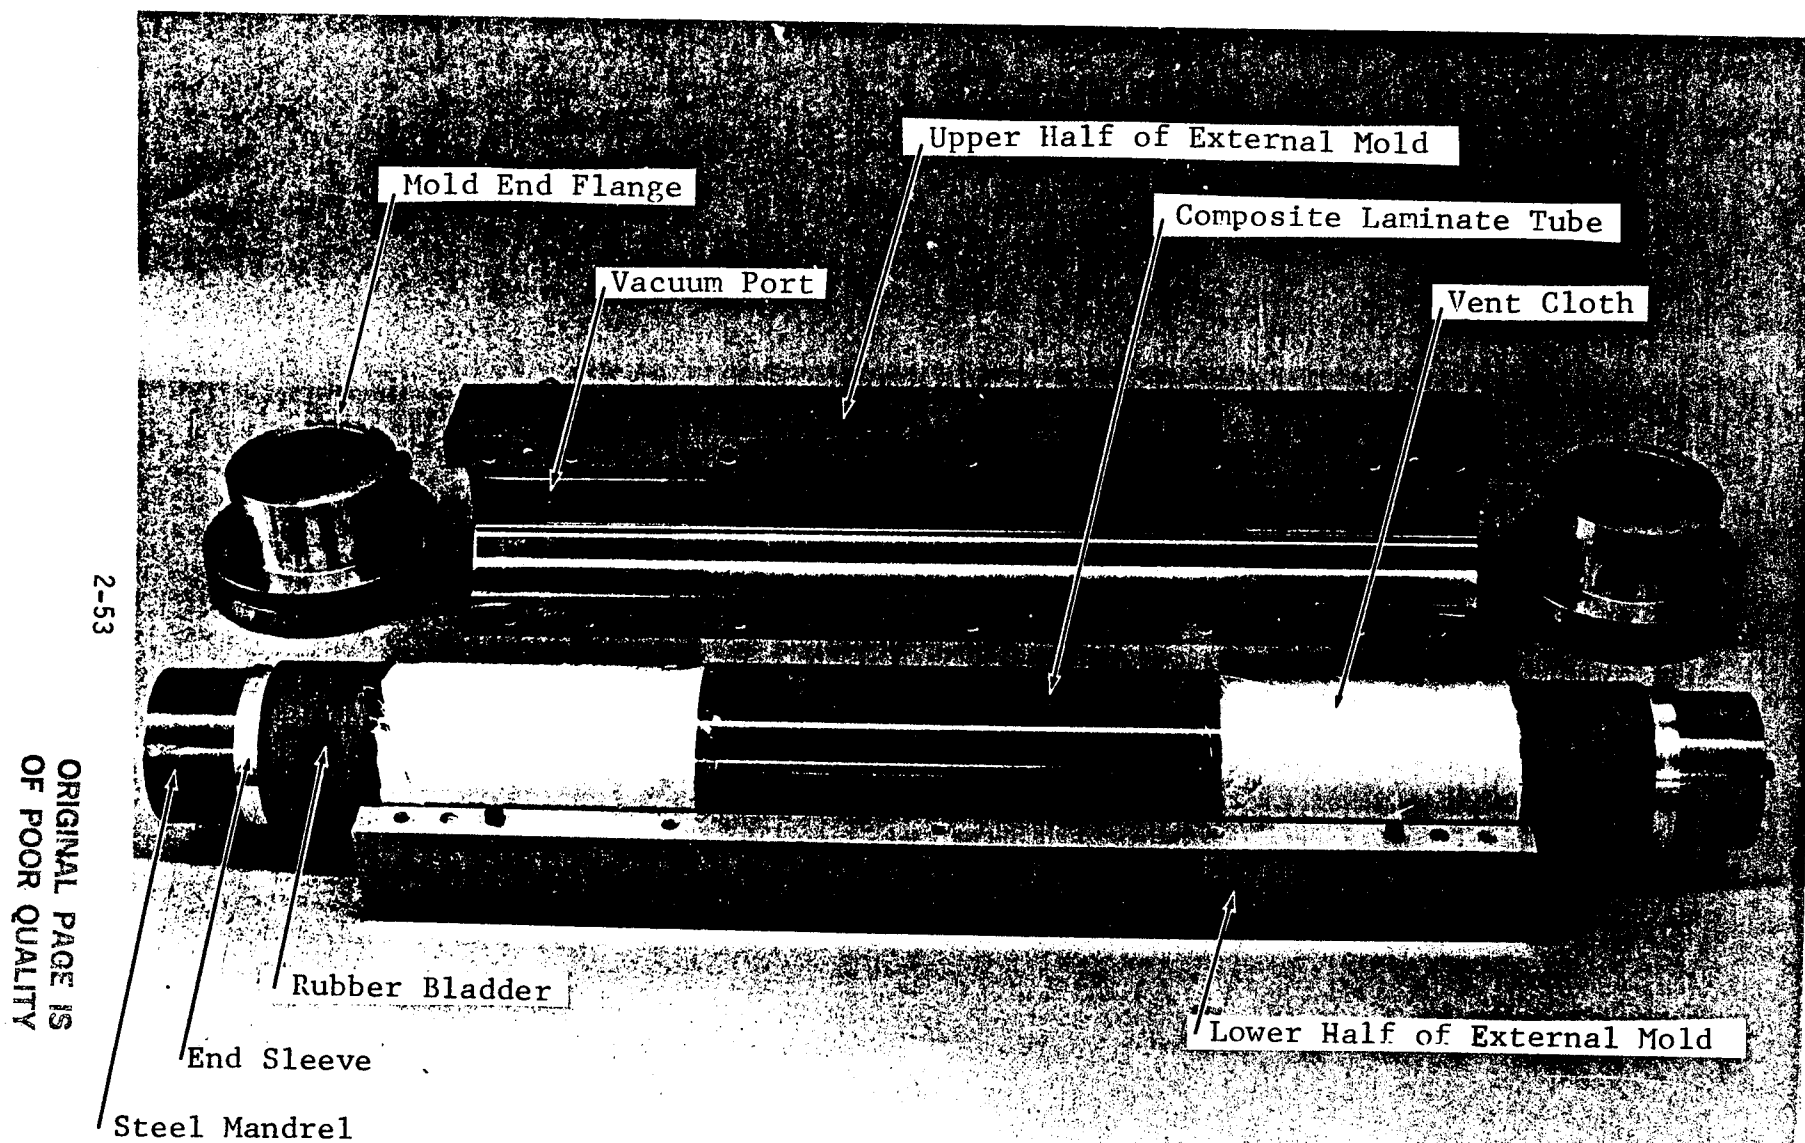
Components of cavity mold tool for fabricating composite laminate tubes.
